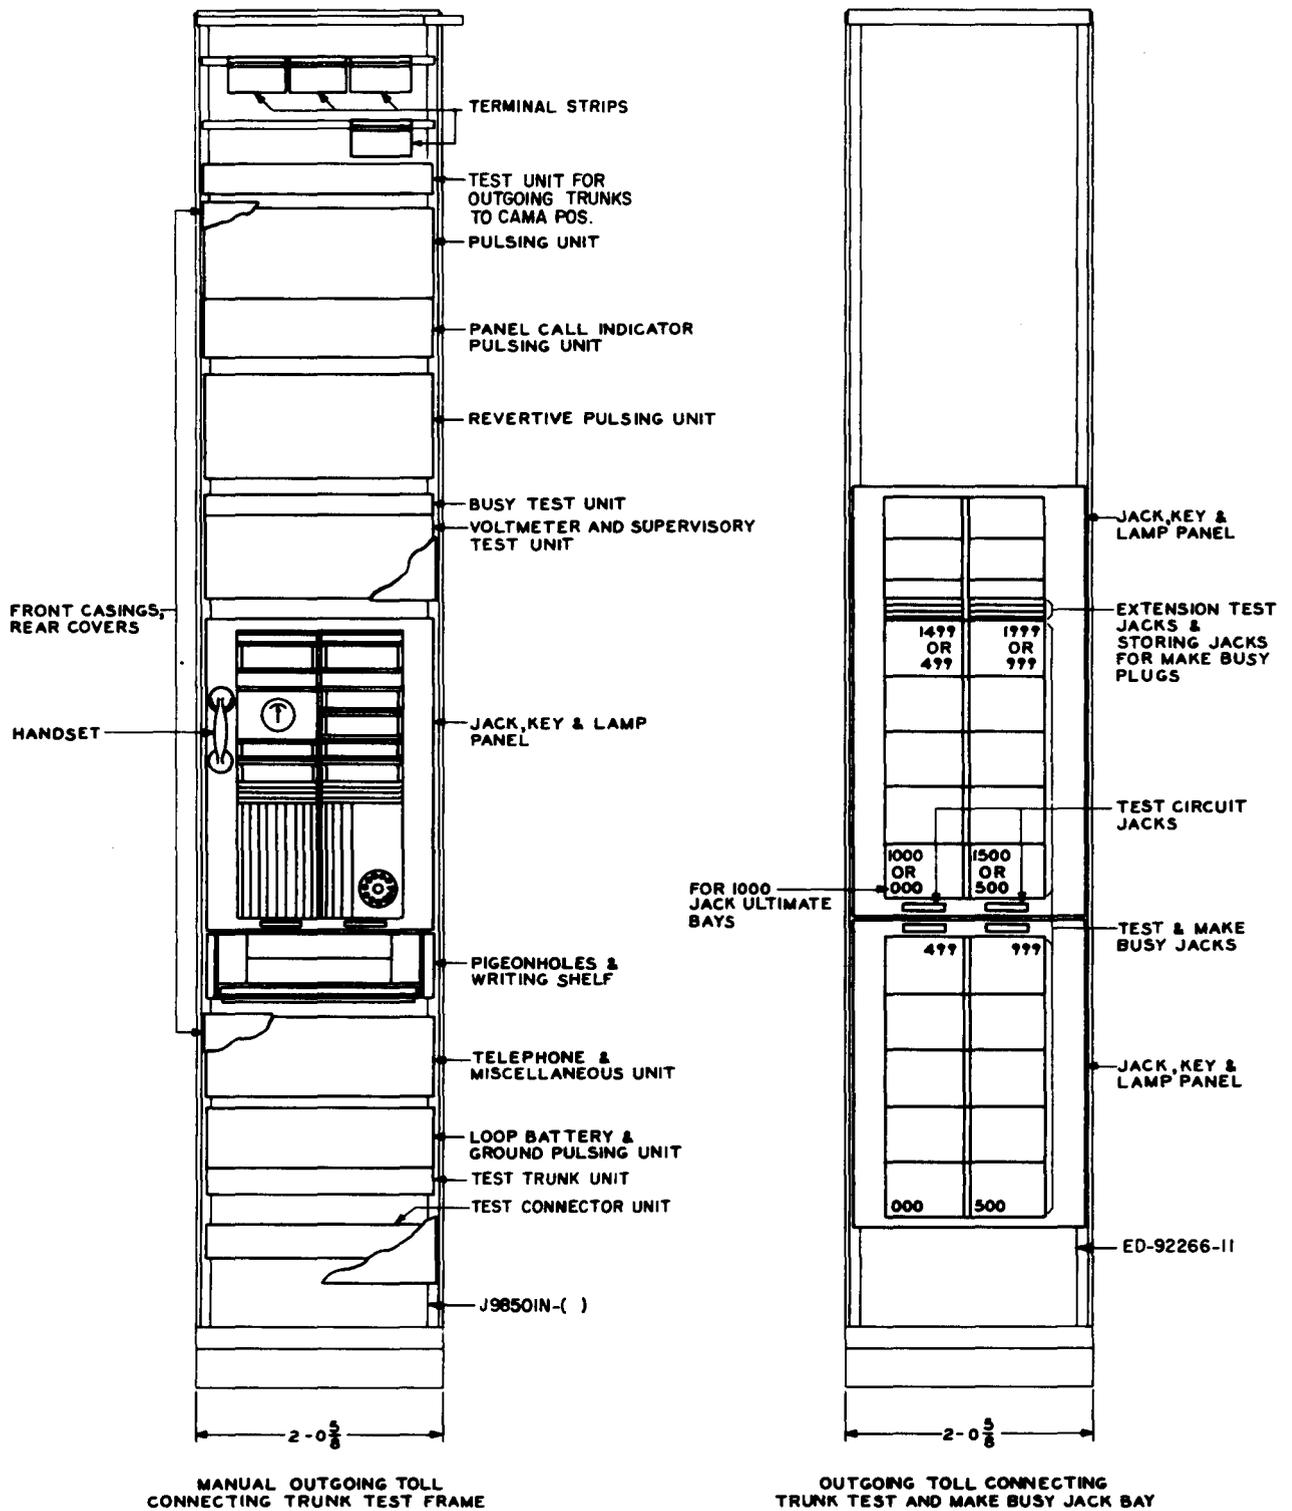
Manual Outgoing Toll Connecting Trunk Test Frame
